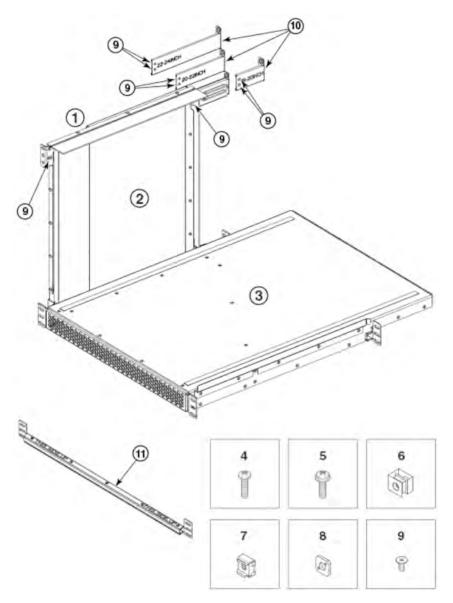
Airflow Diversion and Port-Side Exhaust Kit Assembly for 18-24 in. (45.72 to 60.96 cm) Racks
